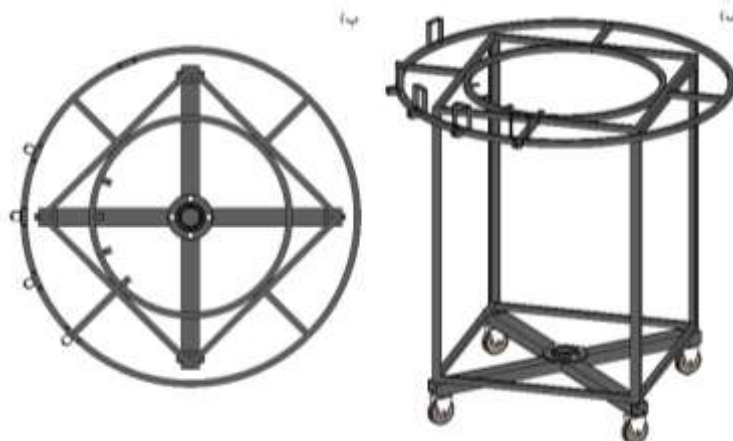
The chassis of flowers grading machine, a) Isometric view, b) Top view.
